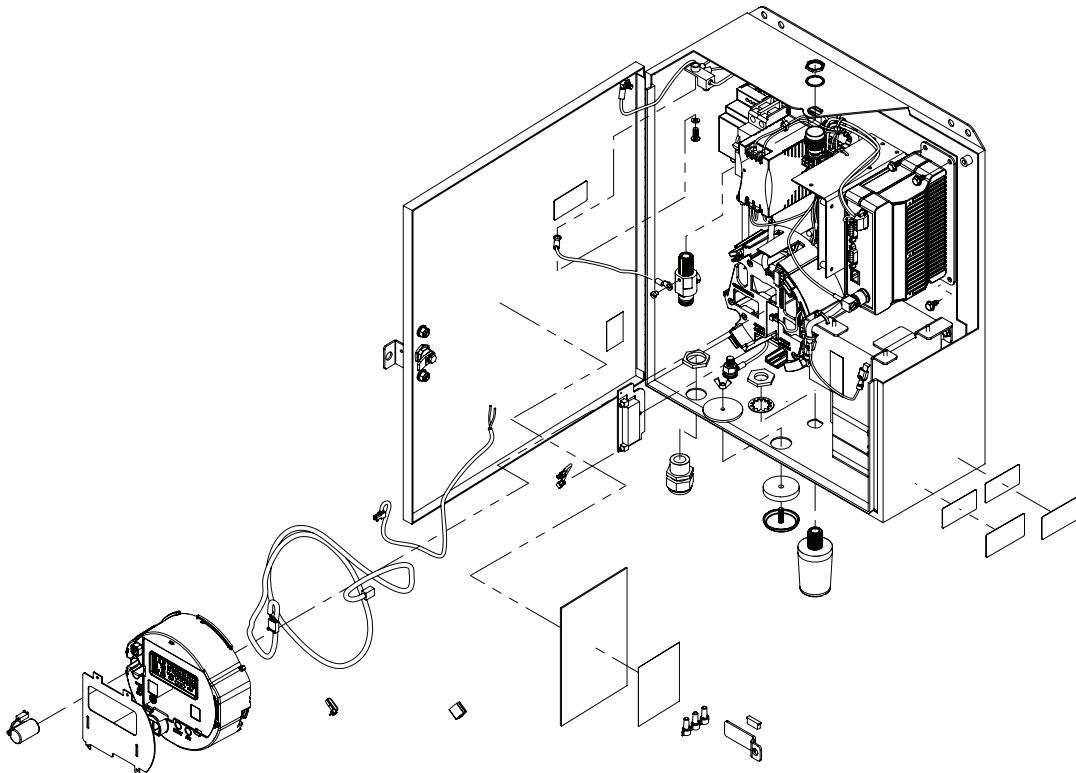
Exploded view, EA_Gatekeeper Series 1 with CalAmp Viper modem (other models are similar)
